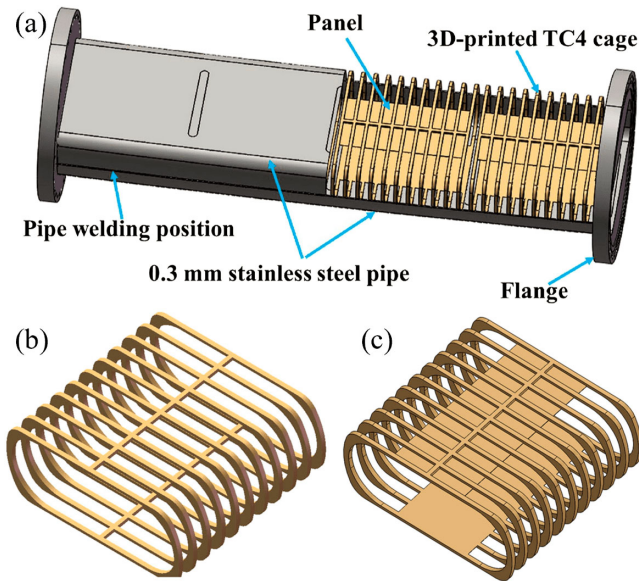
CAD models of (a) thin-walled dipole-magnet vacuum chamber with internal stiffening cage, (b) initial cage design, and (c) cage design with additional cover panels for coupling impedance reduction [230].
